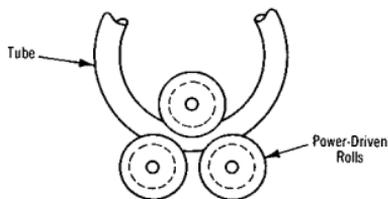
Roll bending. The bend radius is controlled by raising or lowering the top roll.
